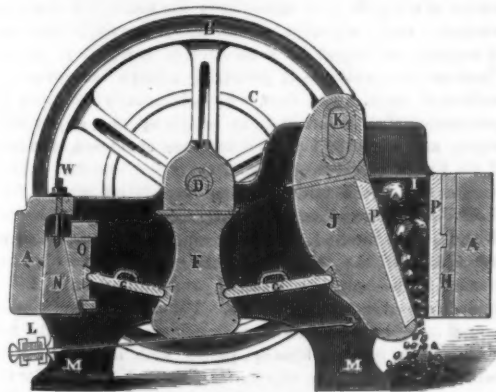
BLAKE'S STONE CRUSHER.—SECTIONAL VIEW.
